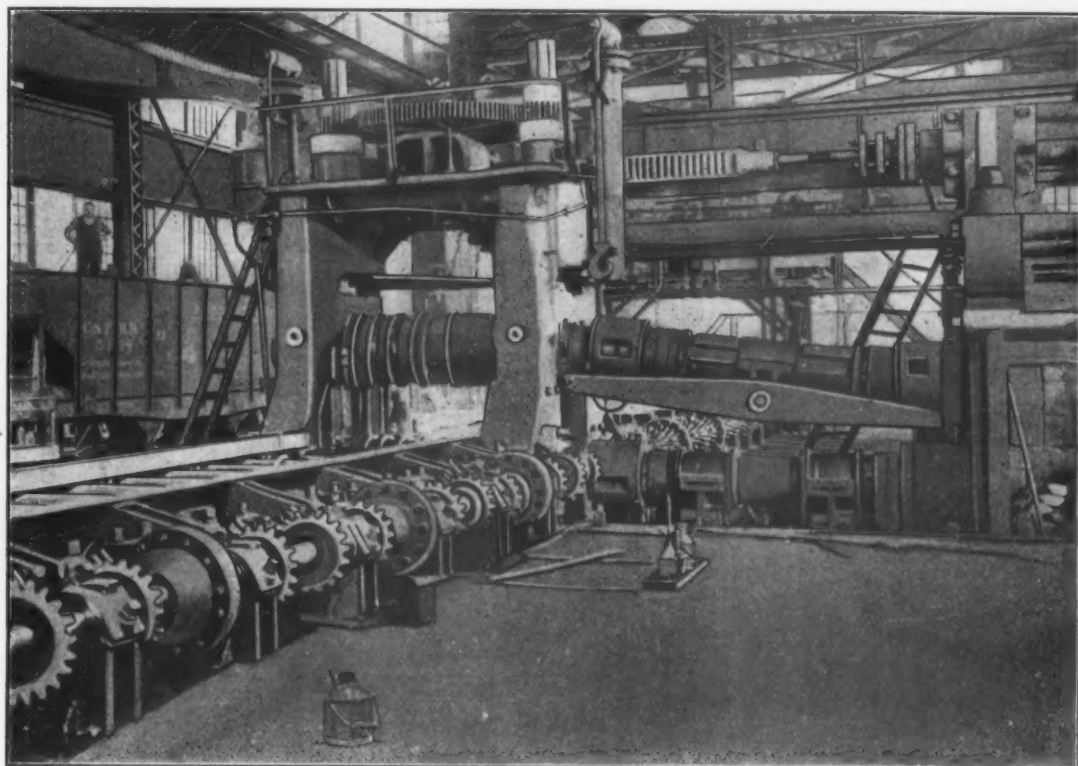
The 40-Inch Blooming Mill and Rear Mill Table.
